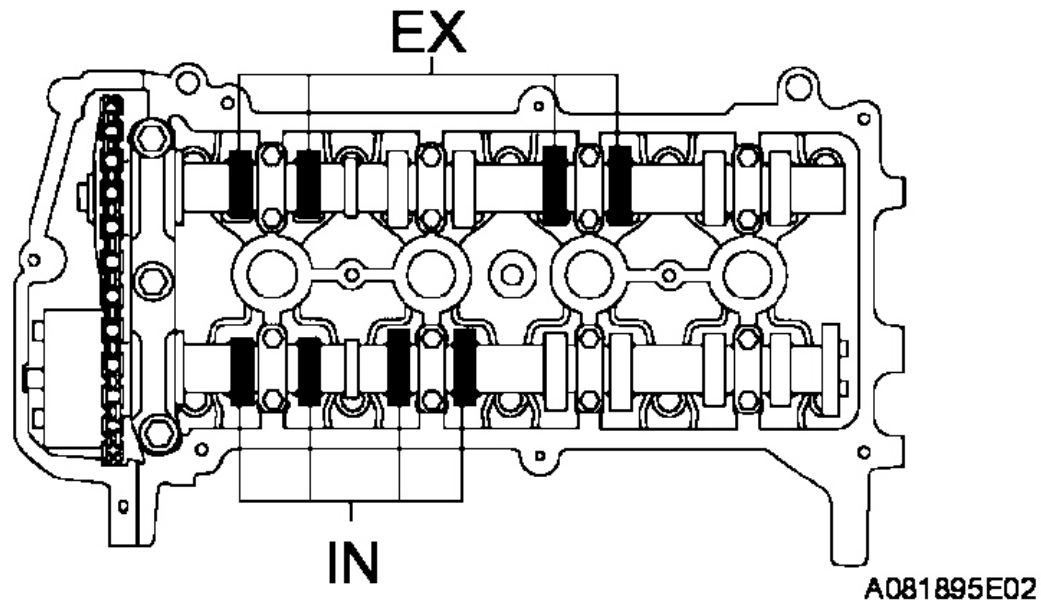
Identifying Valves For Measuring Clearance (No 1 Cylinder TDC/Compression)
